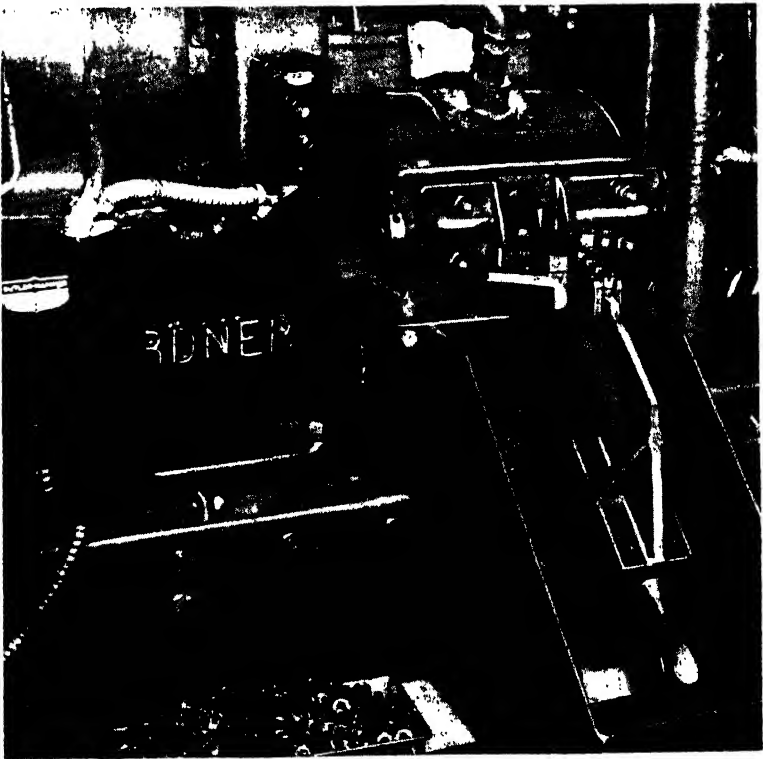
Double-wheel Grinding Machine which Grinds the Flats on Hexagon Nuts
